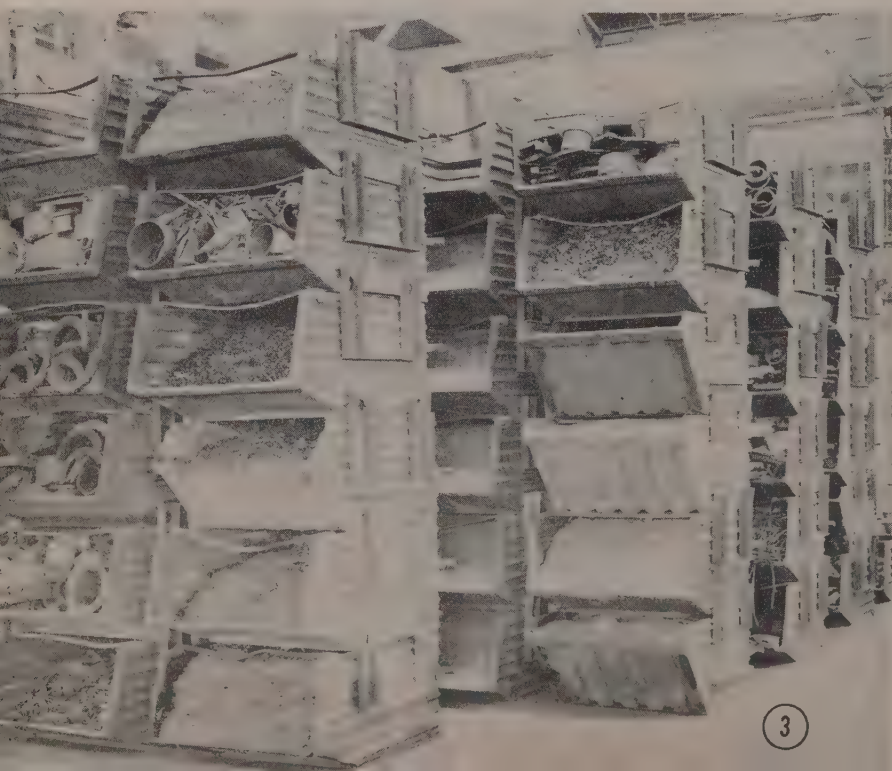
View of skid bins in which sorted and assayed scrap is stored pending removal to melting furnaces. Each bin is marked to show weight and class of contents which overhead crane operator can pick up and discharge directly into reverberatory furnace
